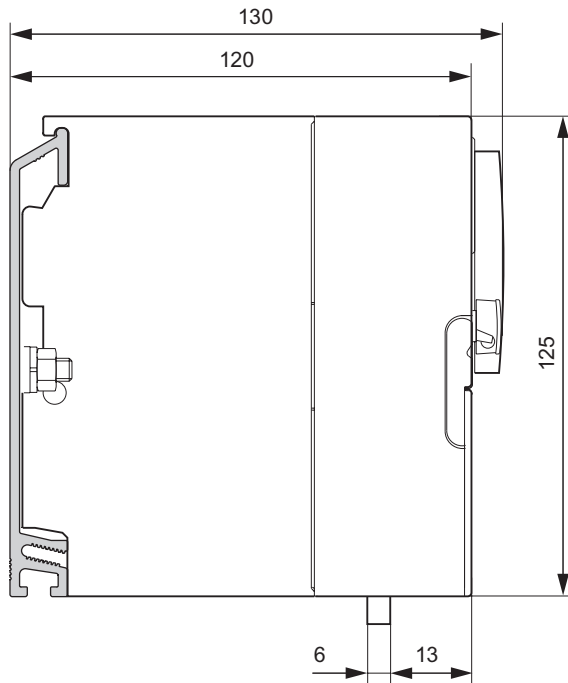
Dimensional drawing power supply module PS 307; 5 A with CPU 313/314/315/315-2 DP, side view
